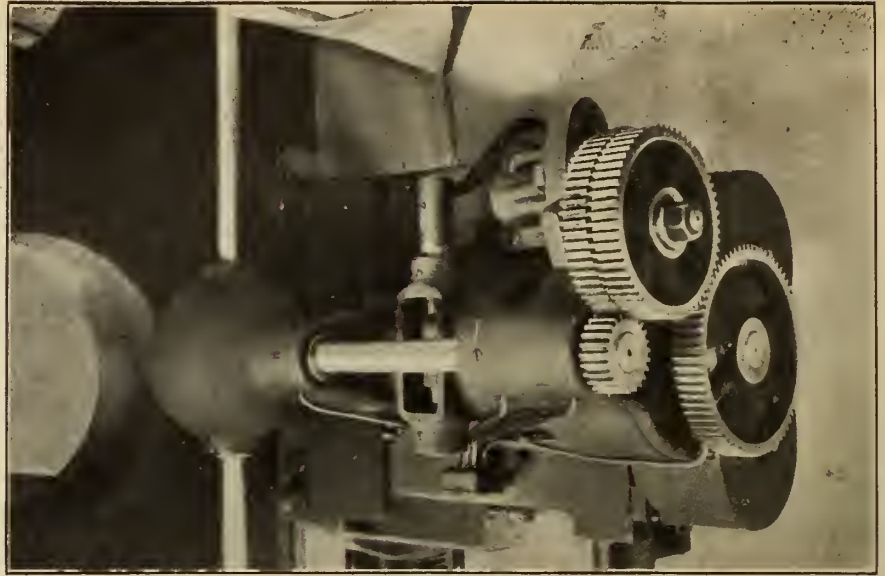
Thread-cutting Attachment and Method of Oiling.
